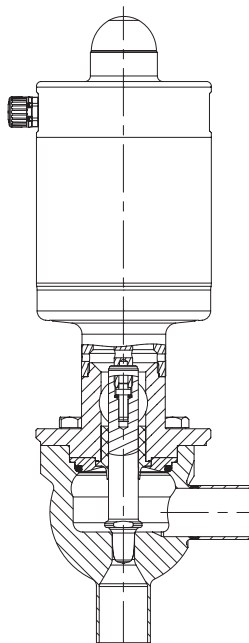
Type 3347/3379 Control Valve with welding ends
